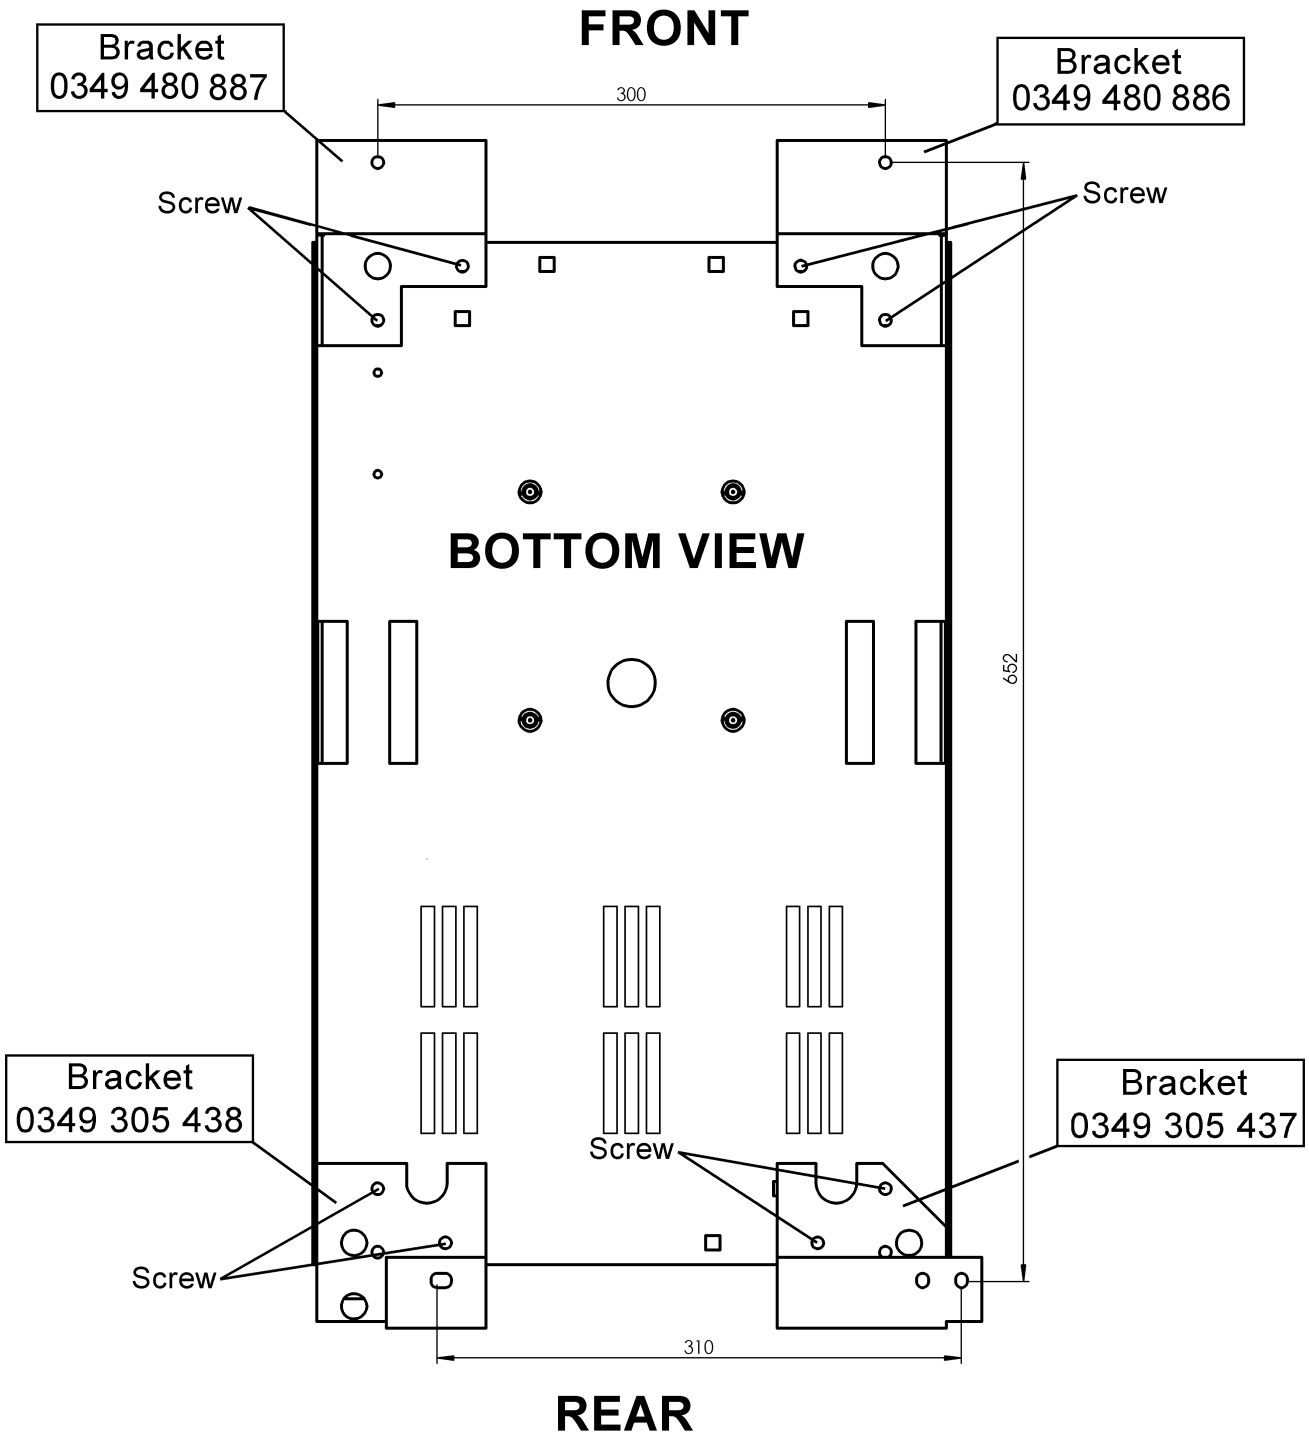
Mounting brackets fastening on Origo™ Mig 402c/cw, 502c/cw, 652c/cw.
